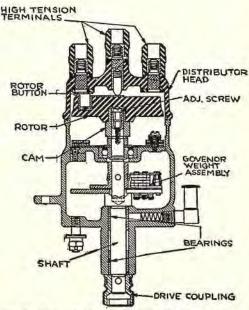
Sectional side view of Delco ignition unit, a top view of which is shown in Fig. 4.
